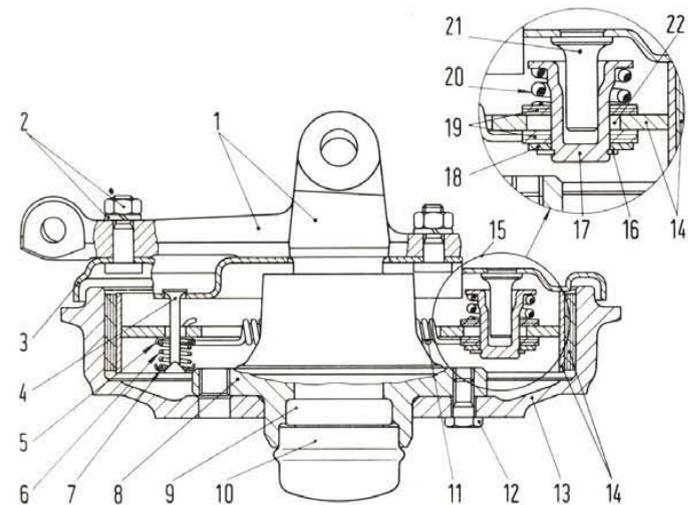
Left front wheel sectional view from with No. for spare 802093.
